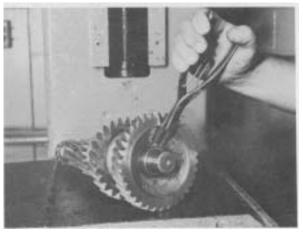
Install drive gear retaining ring. NOTE: Make sure retaining ring is in full position in ring groove.
